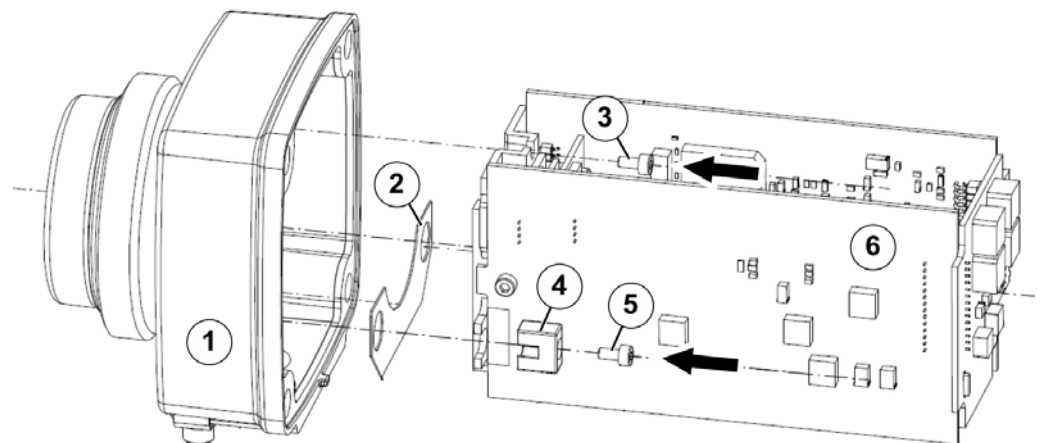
Assemble the flame monitor (the model shown is the D-LX 110 in housing M5)
